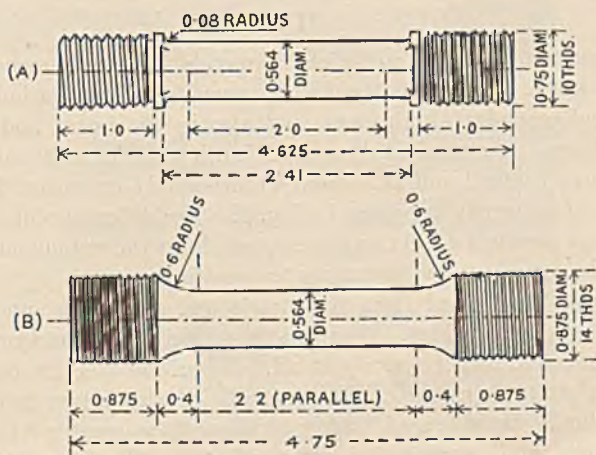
Tensile Test-Piece Forms. (Dimensions in Inches.)
